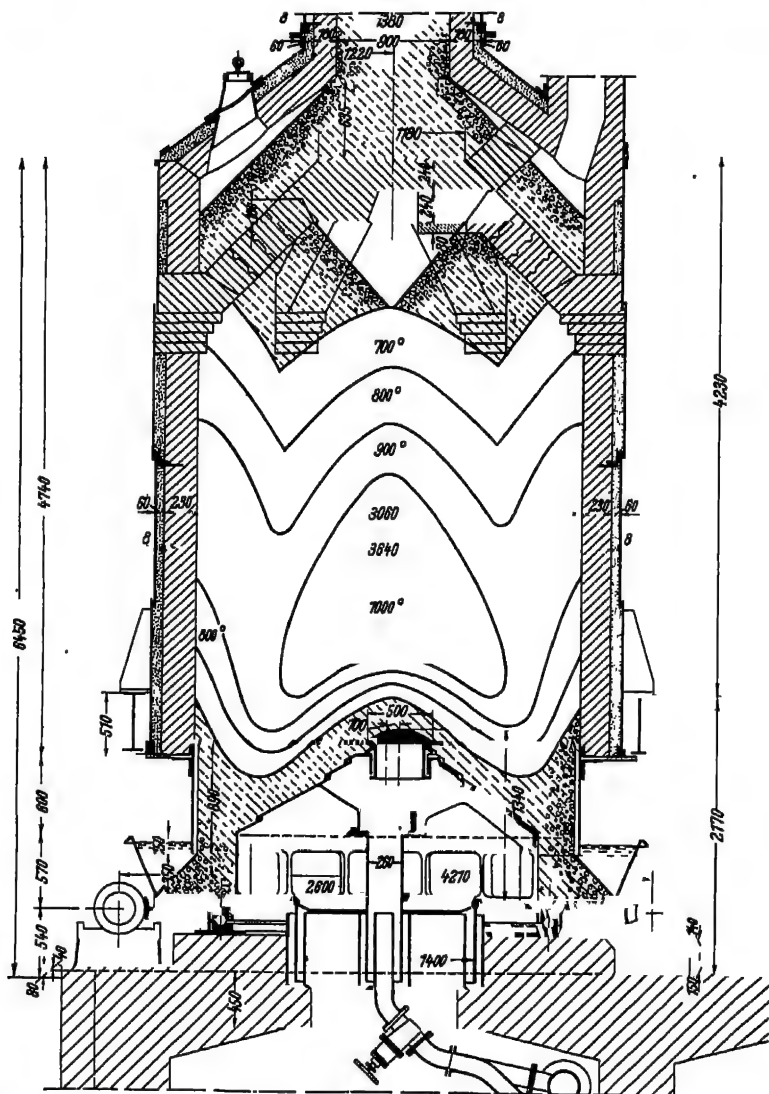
Sectional View of the Re-Constructed Gas Producer Showing the Fire Zone.
